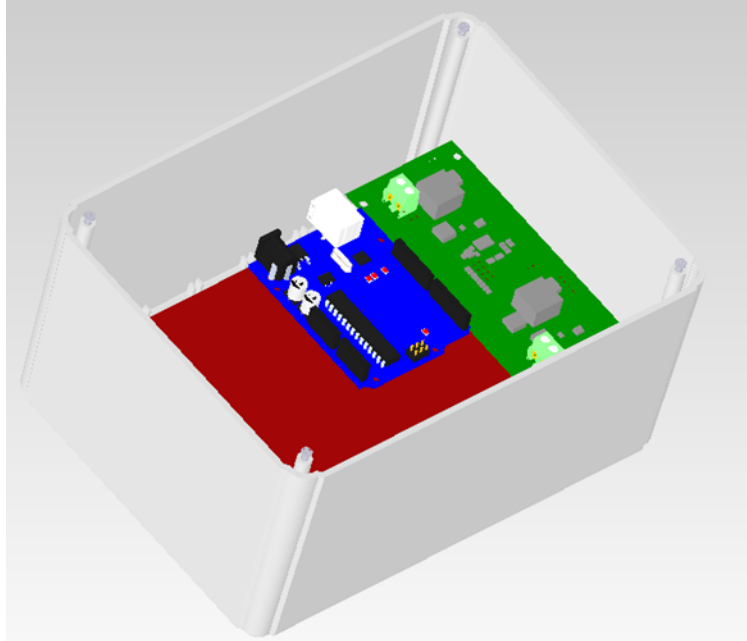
A design of the box carrying the PCB board and the microcontroller [12]
